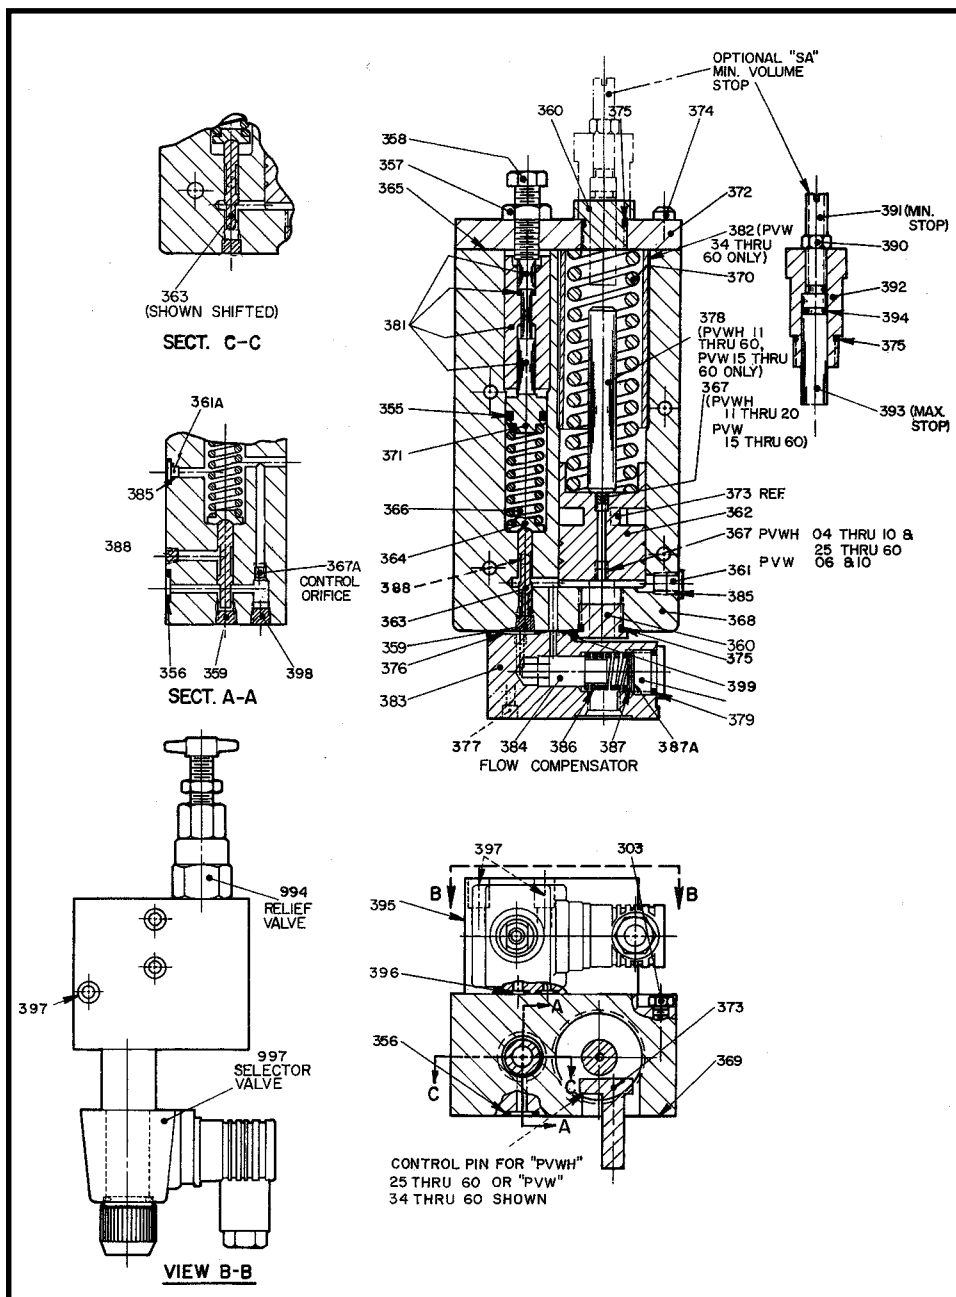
Parts drawing, Oilgear Type "2F" Control (E51215).
